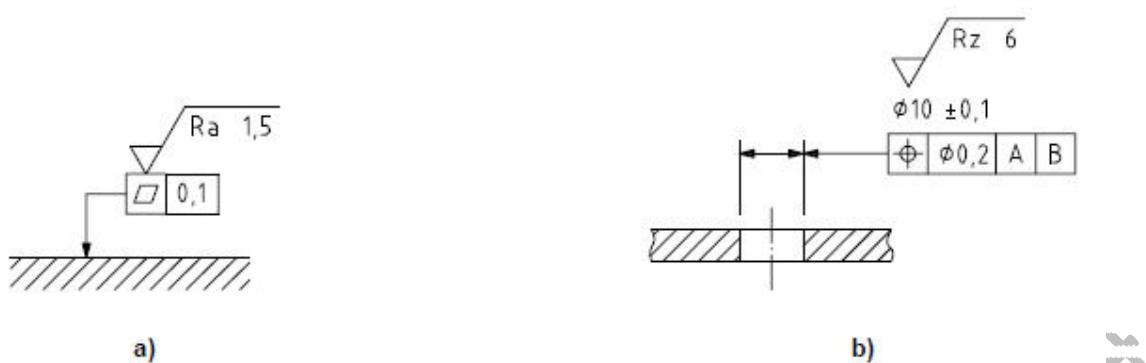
' Surface texture requirement ' Geometrical tolerances indication
